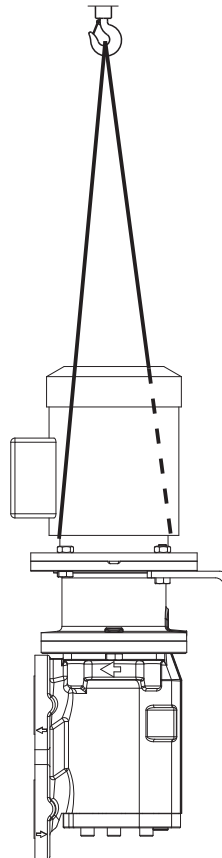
Fastening the lifting gear to the pump unit vertically (as illustrated)
